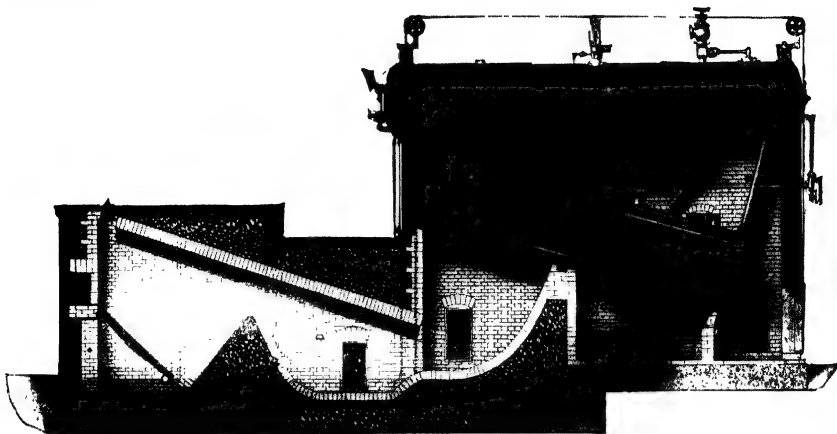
Babcock & Wilcox Boiler fitted with a Frontal Furnace for burning Bagasse with Natural Draught
